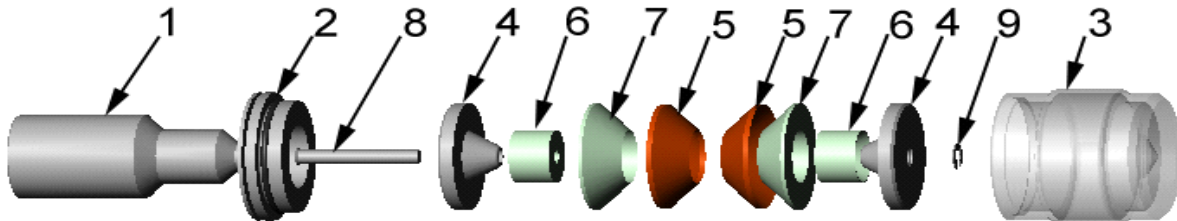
Exploded View, sizes 2.500-in and 3.000-in
